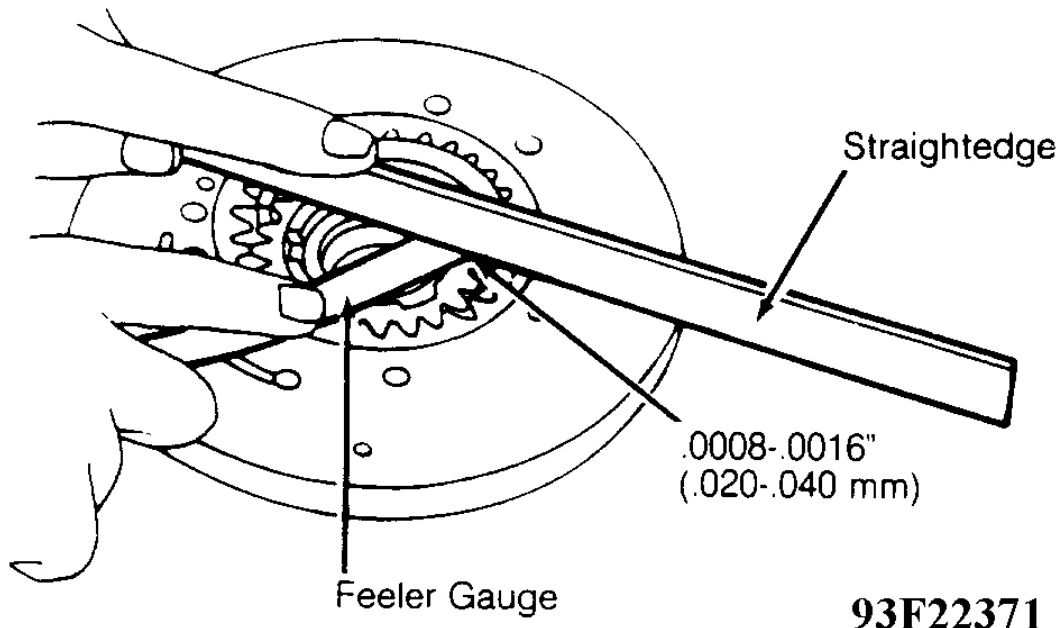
Measuring Oil Pump Housing-To-Gear Face Clearance
